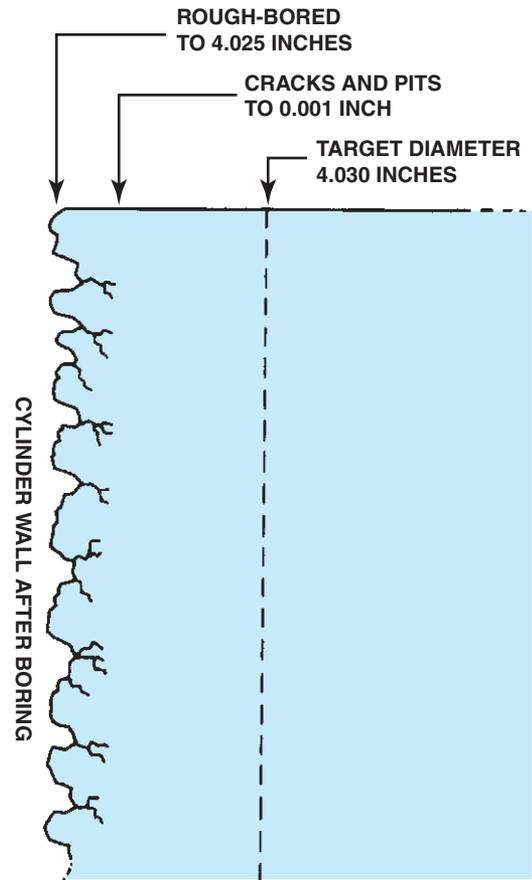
After boring, the cylinder surface is rough, pitted, and fractured to a depth of about 0.001 inch.
